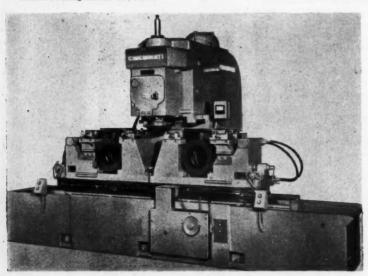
Pendulum milling set-up on a Cincinnati machine for milling flange faces of gate valves with bores from 2 to 10 in. diameter
